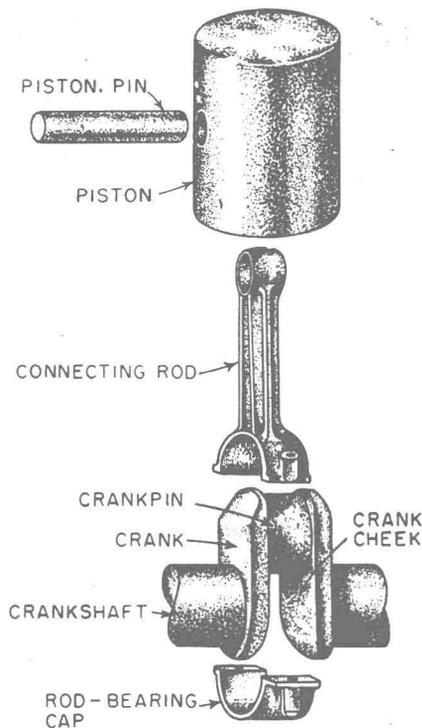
Piston, connecting rod, piston pin, and crank of a crankshaft in disassembled view. The piston rings are not shown.
